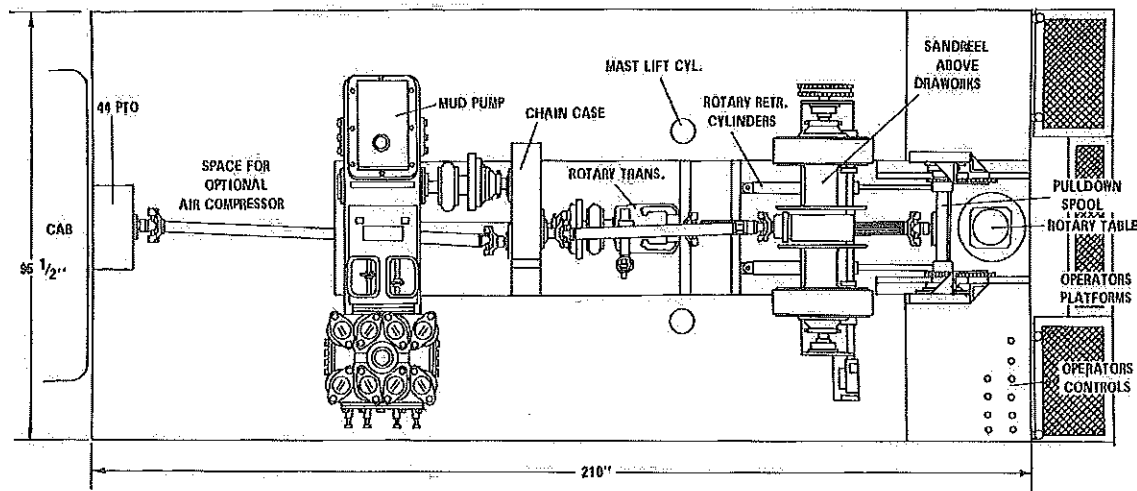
Principal parts of SS-10 Speedstar Drill Rig
